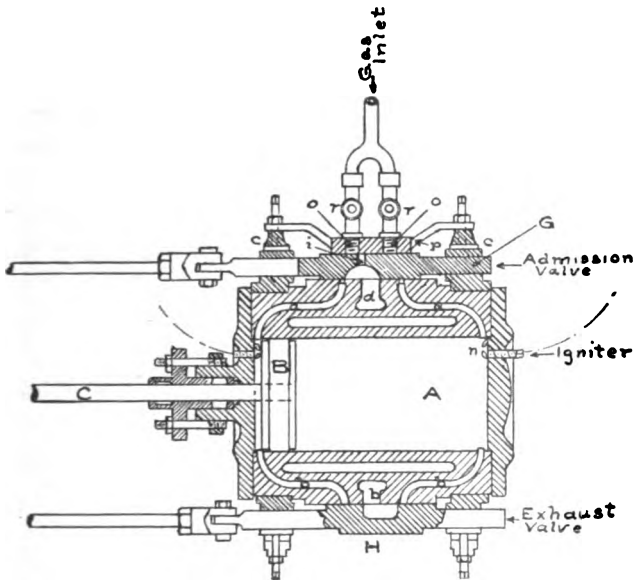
Longitudinal Section of Cylinder of Lenoir Engine.
